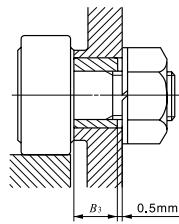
Length of the mounting hole of Eccentric Type Cam Follower
